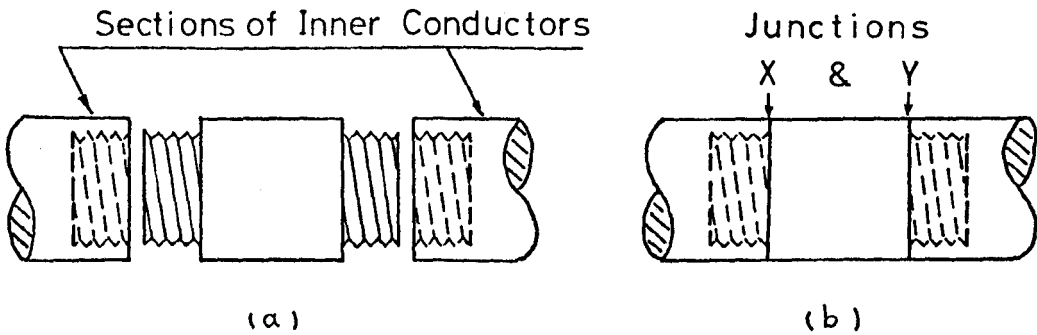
Insertion of a single piece of material into the test sample location of a coaxial contact measuring device.
